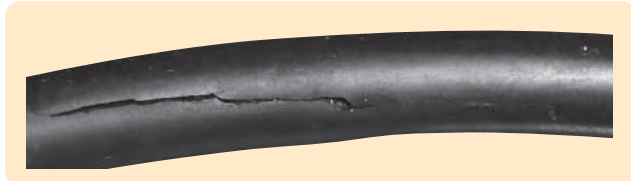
O-Ring Damaged by Explosive Decompression
